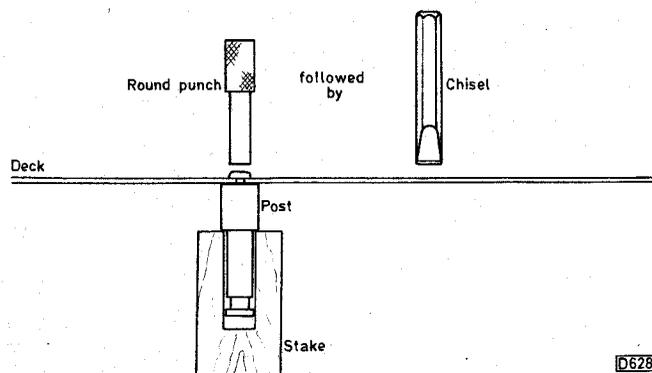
Use of a stake, punch and chisel for re-riveting. Four stake sizes cover all posts in the machine.
